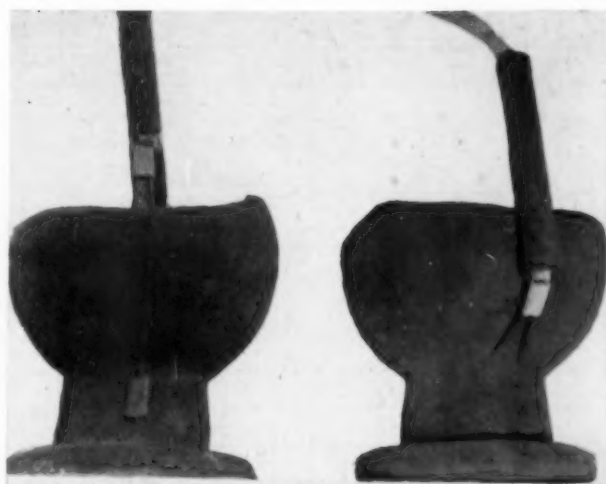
Ball socket casting. Left, thermocouple attached to the top (fastest cooling section); right, thermocouple attached to the neck (slowest cooling section).
